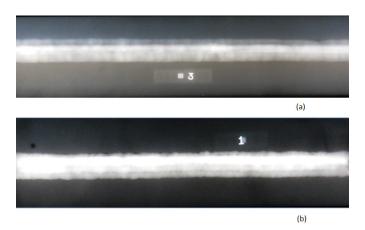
Radiographic photography of welded joints where a) welded joint without faults (2202) and b) welded joint with incompatibility in the form of boundary bonding (2127)
